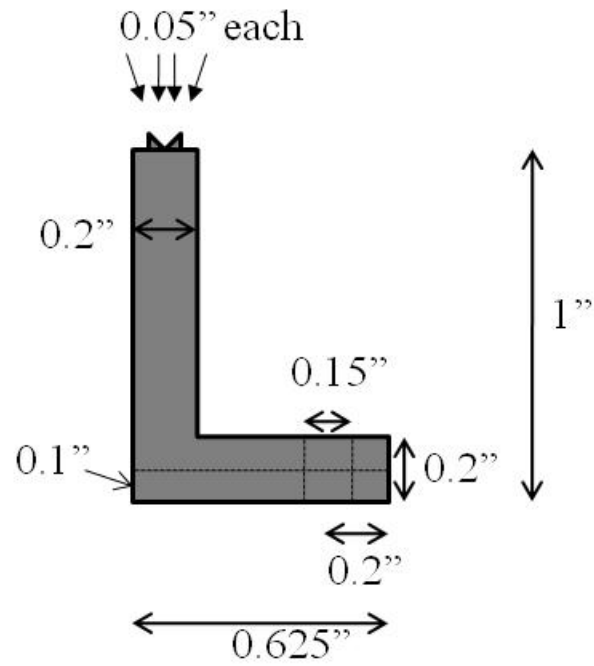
Schematic (side view) of slider component for four point bend apparatus.
